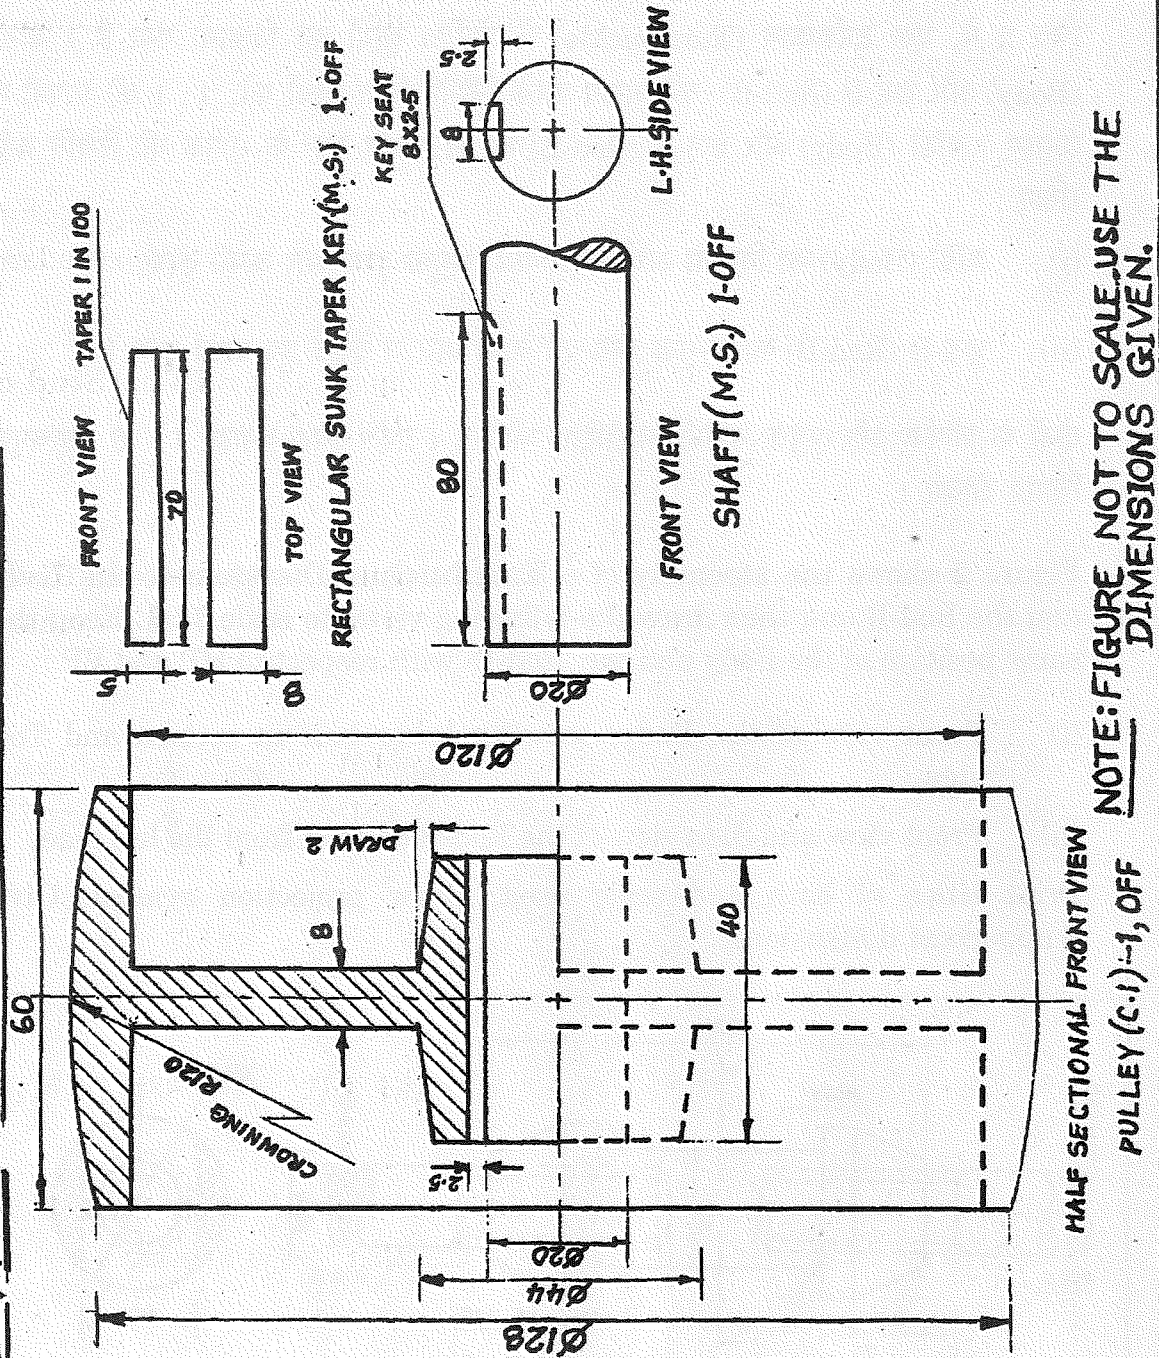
shows the details of the parts of a Solid Web Cast Iron Pulley. Assemble these parts correctly and then draw to scale 1 : 1 its following views :
